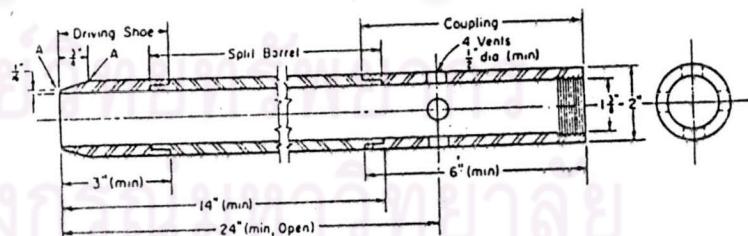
Standard Split-Barrel Sampler Assembly.
